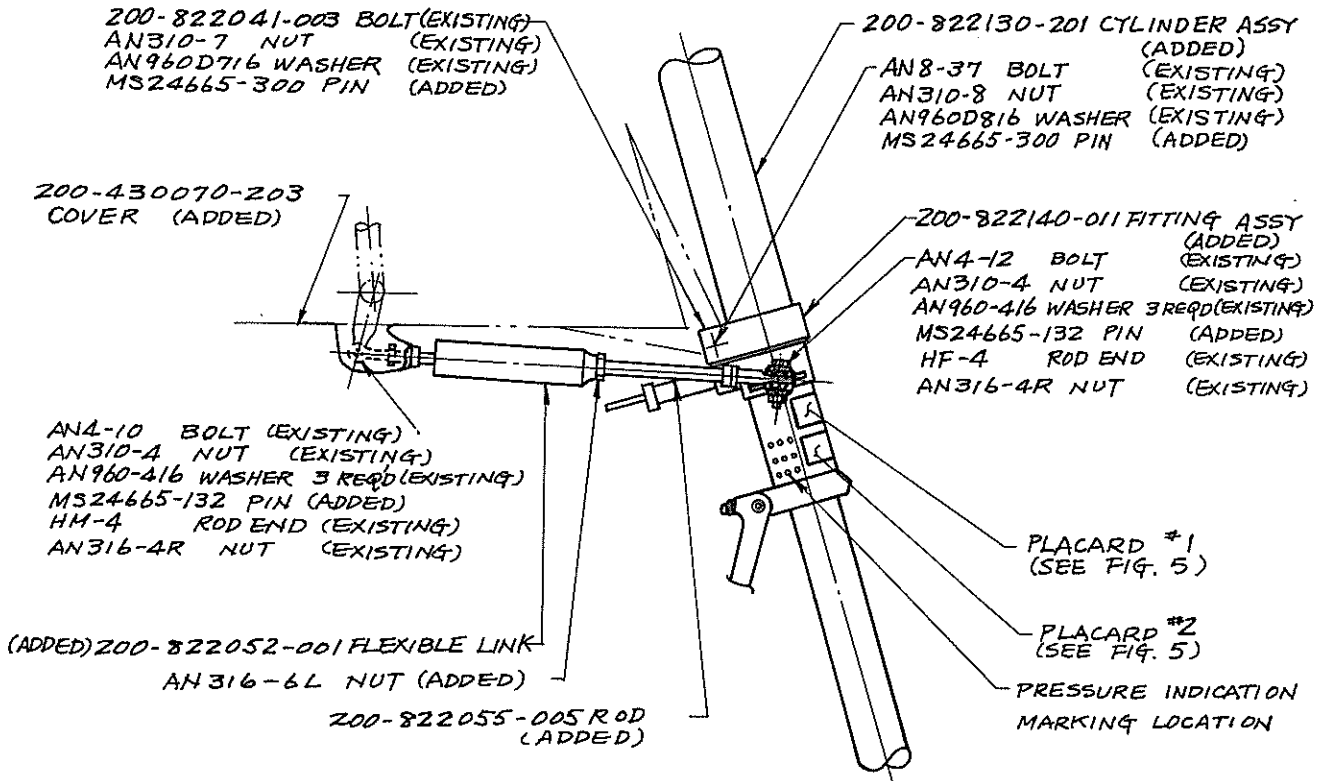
MODIFICATION OF STEERING MECHANISM - CHANGE NO. 2
